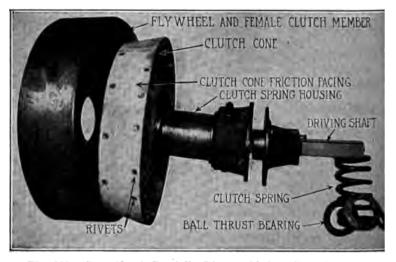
Cone Clutch Partially Disassembled to Show Important Components.
